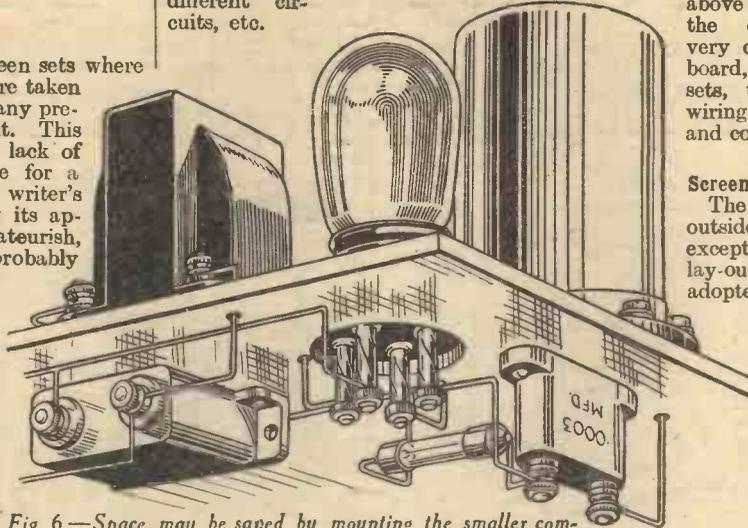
Space may be saved by mounting the smaller components "below deck."
